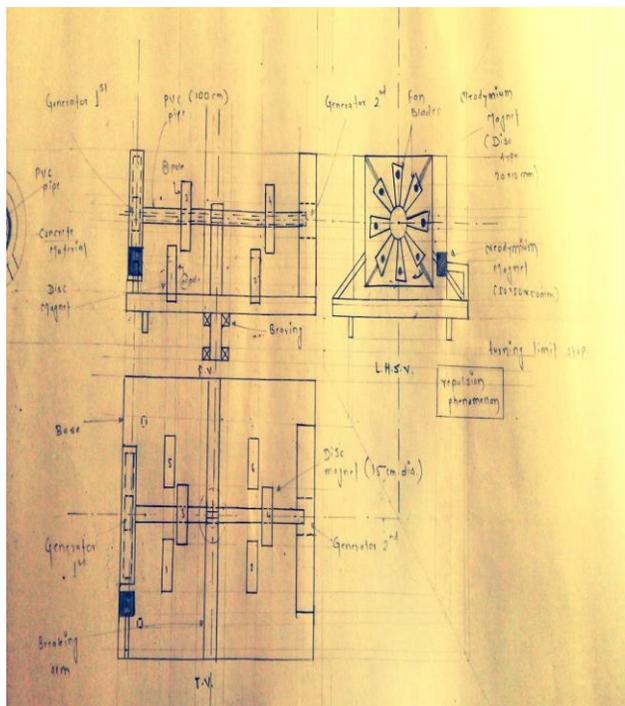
Constructional Details of Magnetic Power Based Windmill
